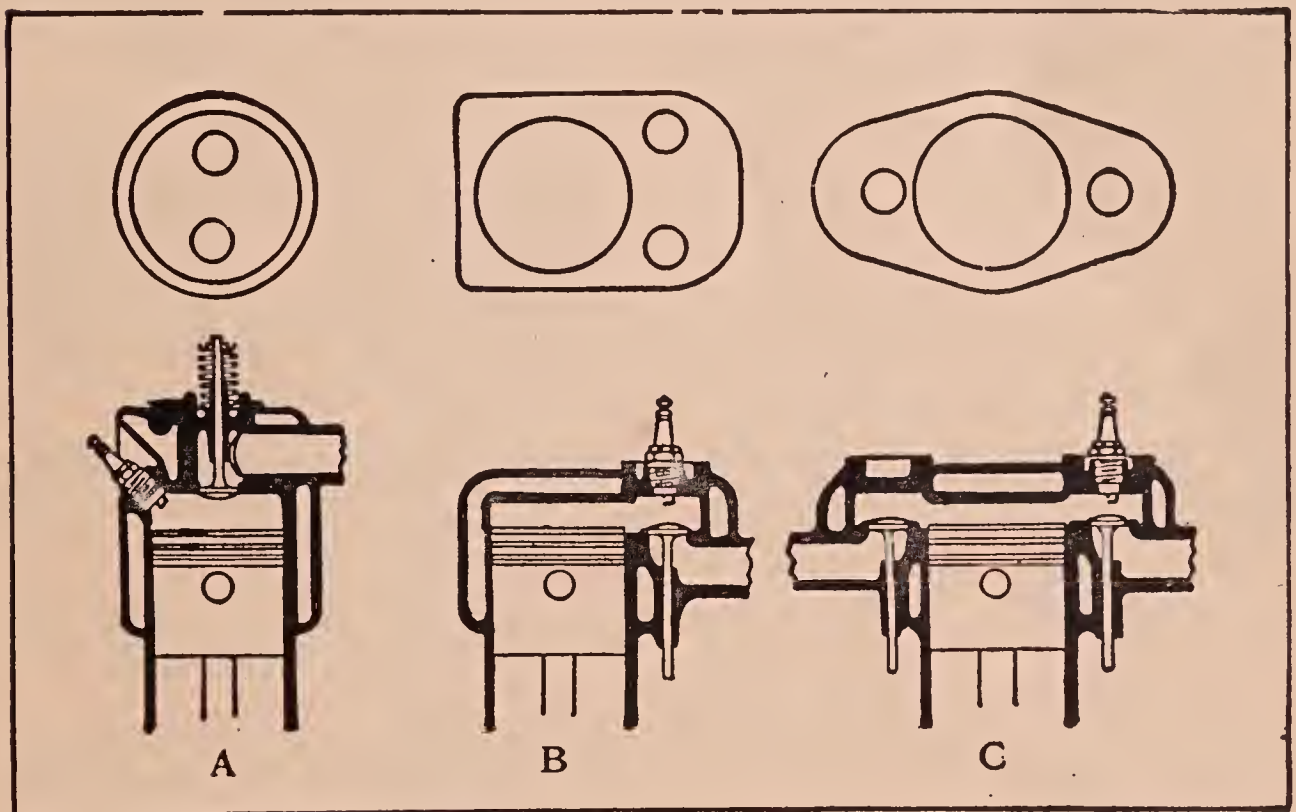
I-, L-, and T-Head Engine Valve Arrangement
